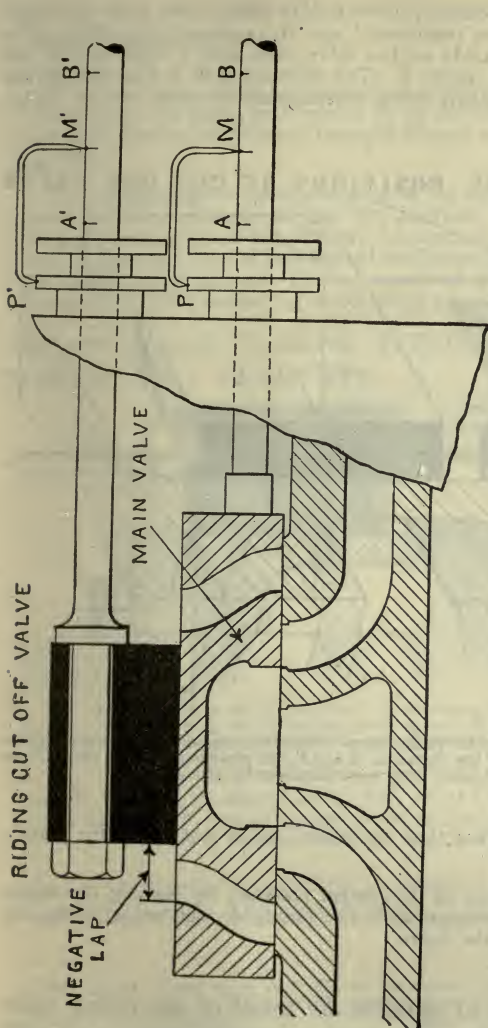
The riding cut off gear with both valves in neutral position. Tram marks M, M' , are made on the stems to locate these positions, also A, B , and A', B' , to locate the extreme positions. The same tram should be used for both valve stems.
